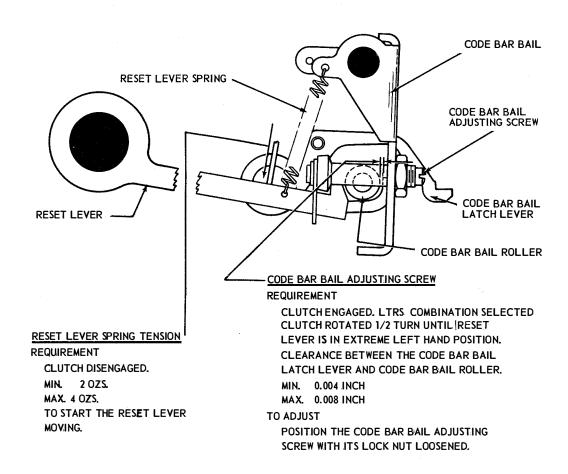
KEYBOARD, CODE BAR BAIL MECHANISM, FRONT VIEW
